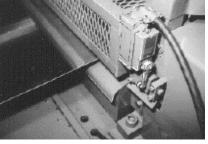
Metal enclosure prevents overhead access to straightener and pinch rolls. Metal plates cover upper pinch roll bearing box squeeze points. Fig. 14 Limit switch releases pinch roll air pressure when using the recommended straightener roll cleaning method shown on page eight.
